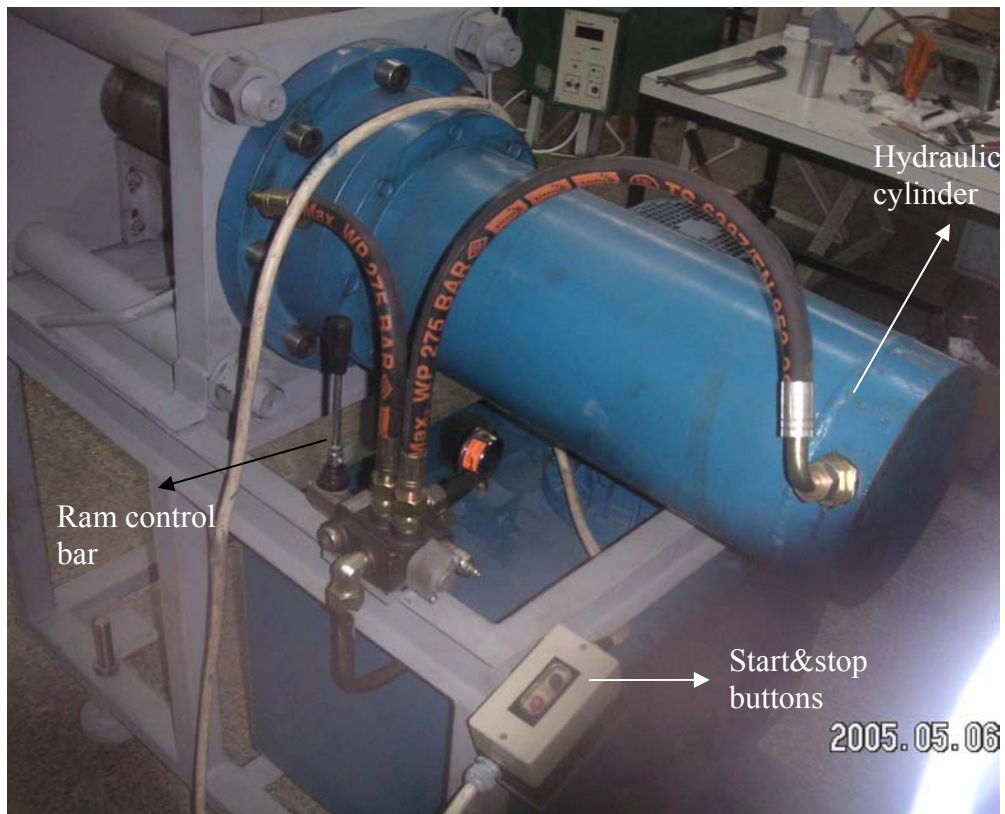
Hydraulic cylinder and ram control parts of the unit
